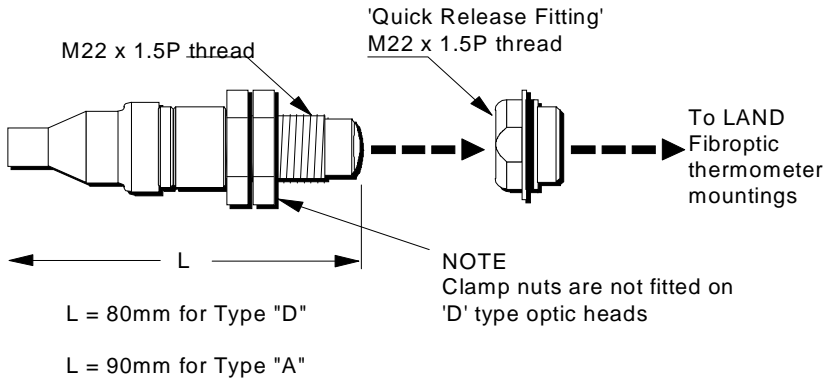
(b) Mounting the optic head into Land Fiberoptic thermometer mountings
